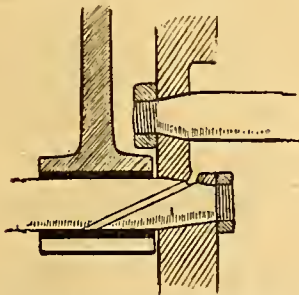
Arrangement of drilled crank pin and recess in flywheel of Excelsior engine.
